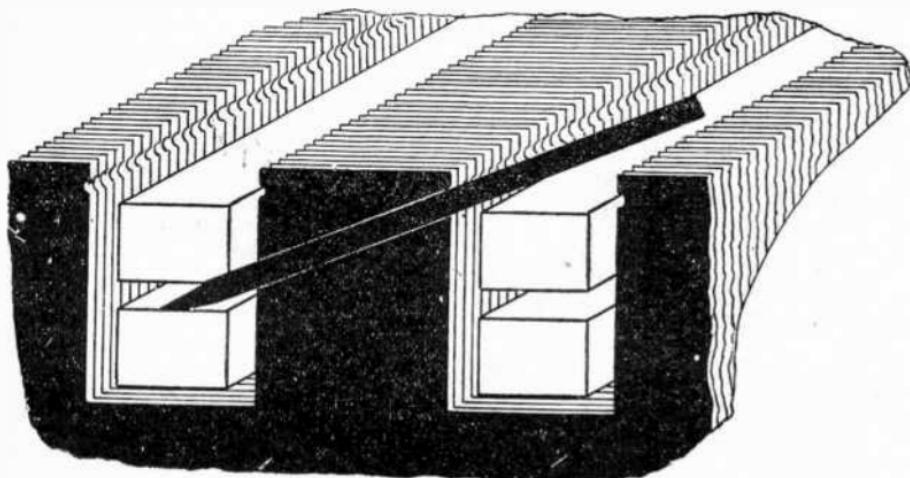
Wrong way to remove a coil. Don't use the lower coil as a fulcrum.
